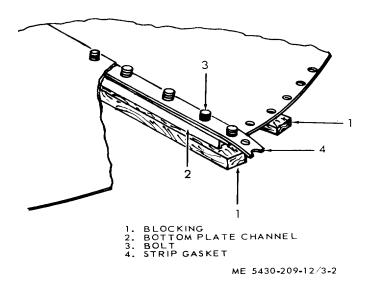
Channels, bolts, and gaskets installed on bottom plate.
